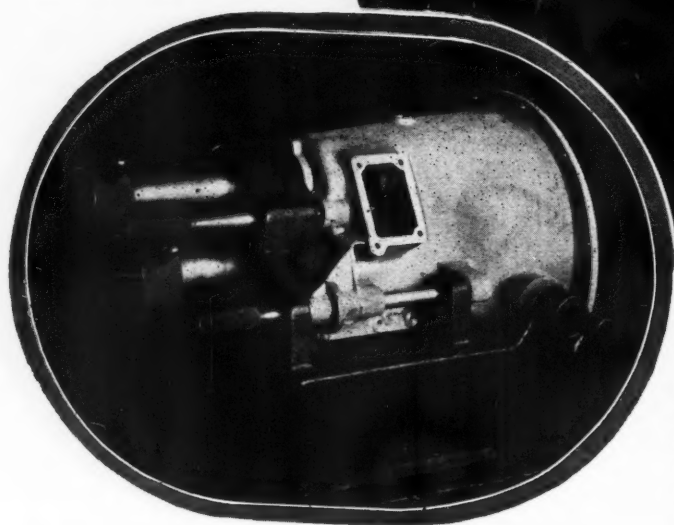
A fixture for checking the accuracy of machine work on transmission cases
